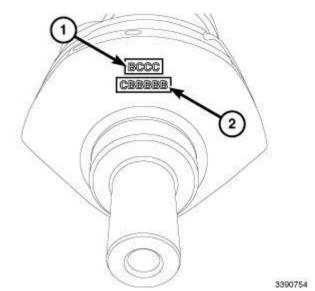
Bearing Identification & Letters Stamped Into Crankshaft
